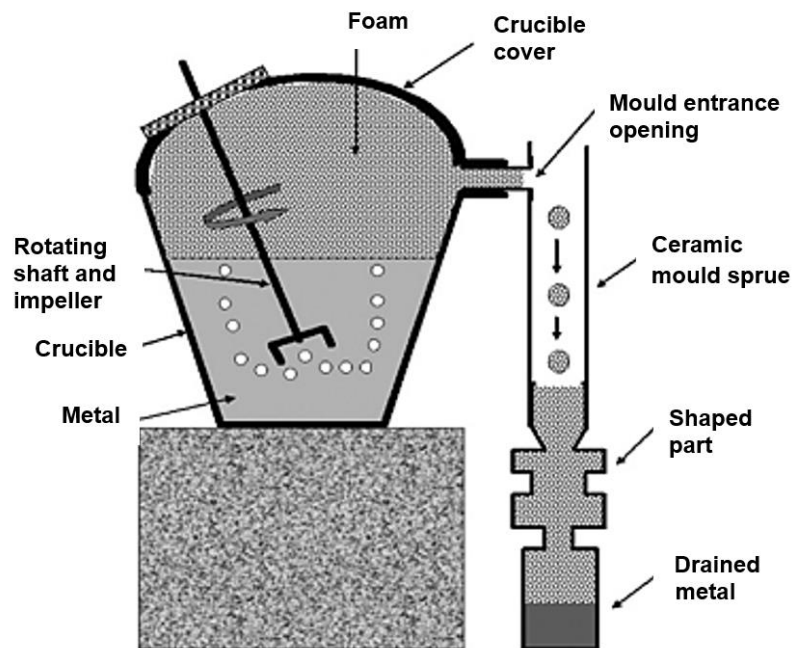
Schematic of the METCOMB method principle, casting configuration showing the crucible, rotating impeller blades and ceramic shell mould made by the melt model method [17]
